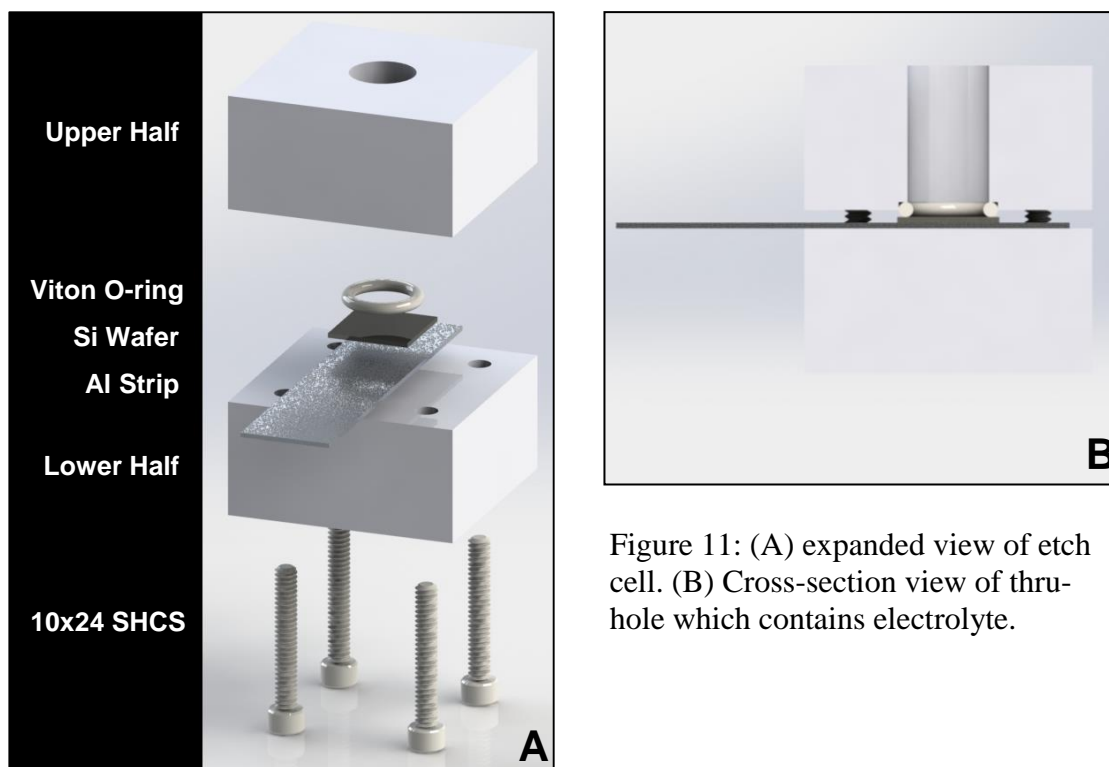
(A) expanded view of etch cell. (B) Cross-section view of thru-hole which contains electrolyte.
